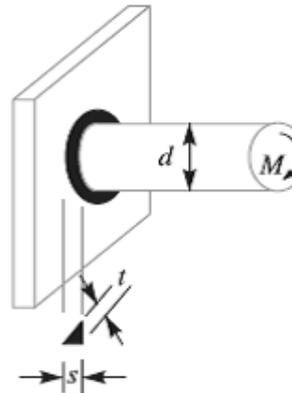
Circular fillet weld subjected to Bending moment.
